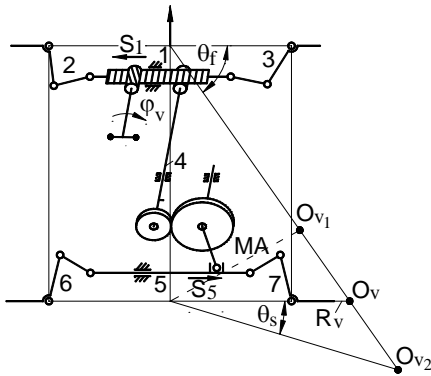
Classical scheme of integral steering mechanisms with rack/slider.
